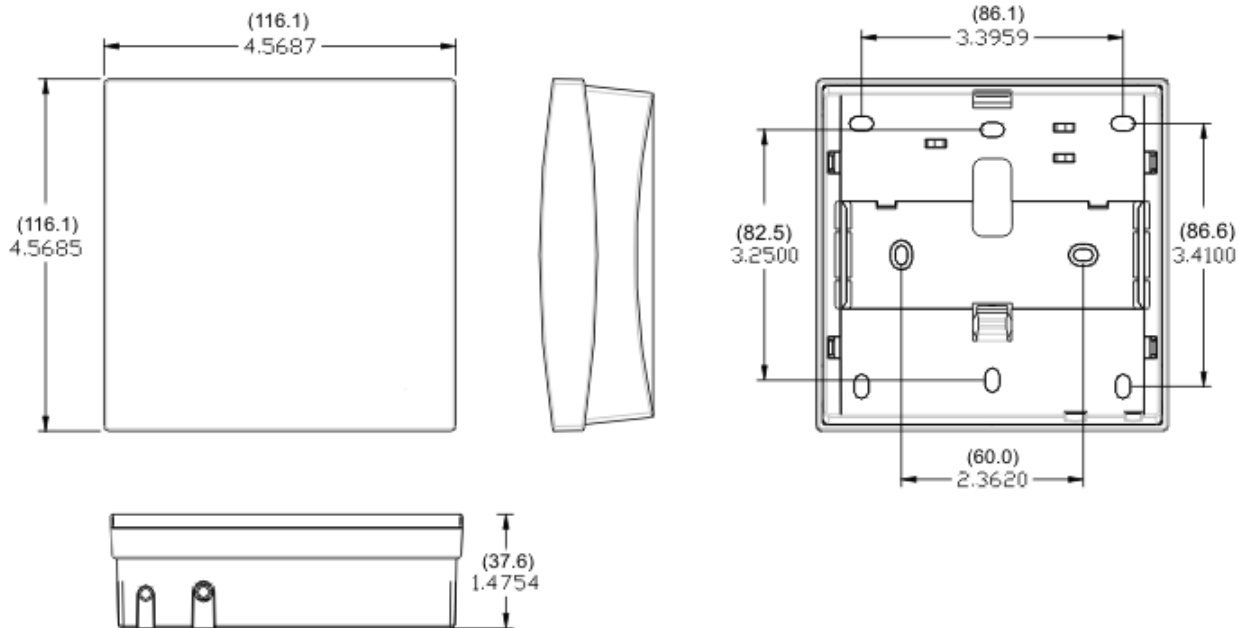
LN Series Scheduler Dimensions, in. (mm)
